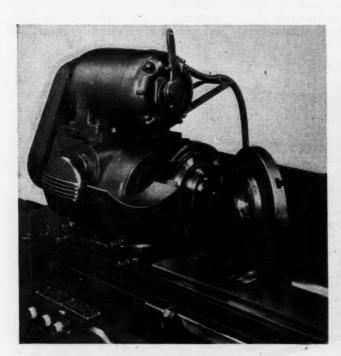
New Headstock of Cincinnati Grinder with Modified Lathe Spindle Nose Designed to Take Standard Faceplates and Chucks
